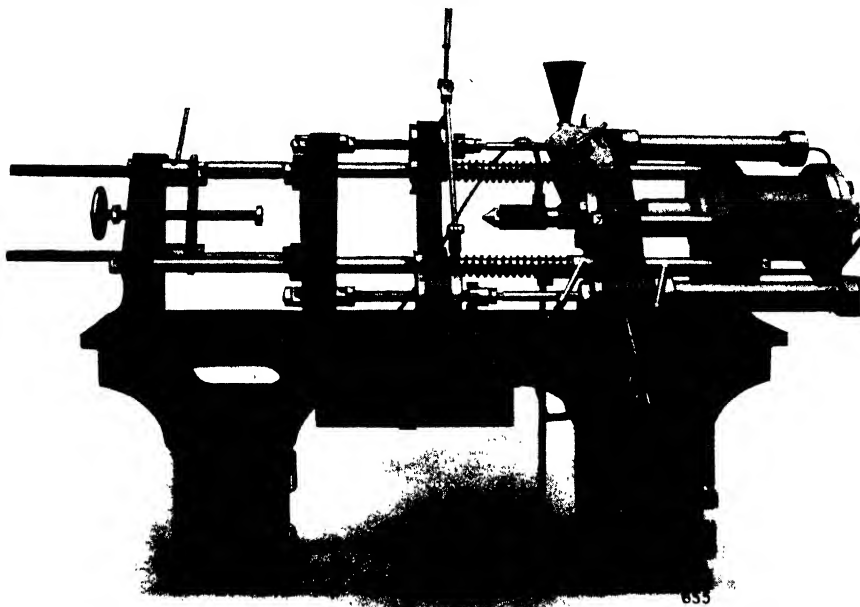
Compressed Air Injection Machine. (Francis Shaw & Co., Ltd.)
